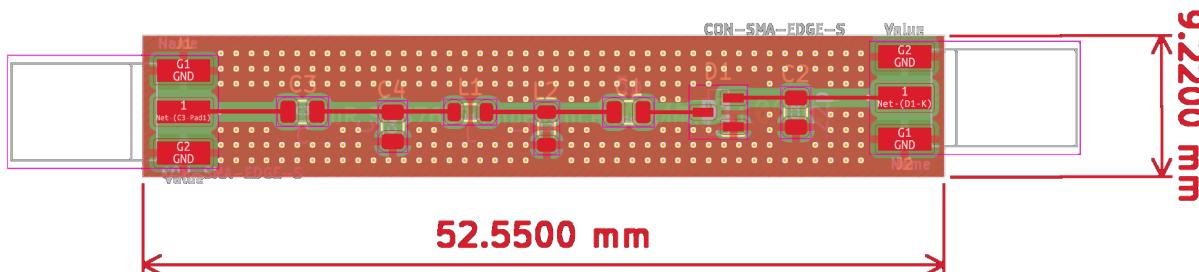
WuR Impedance Prototyping Board Layout with SMS7630
